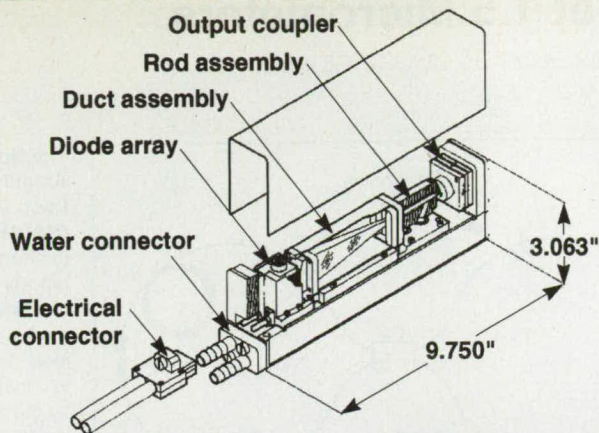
Exploded diagram of the laser showing the Diode Array and the Lensing Duct Assembly in its structure.
